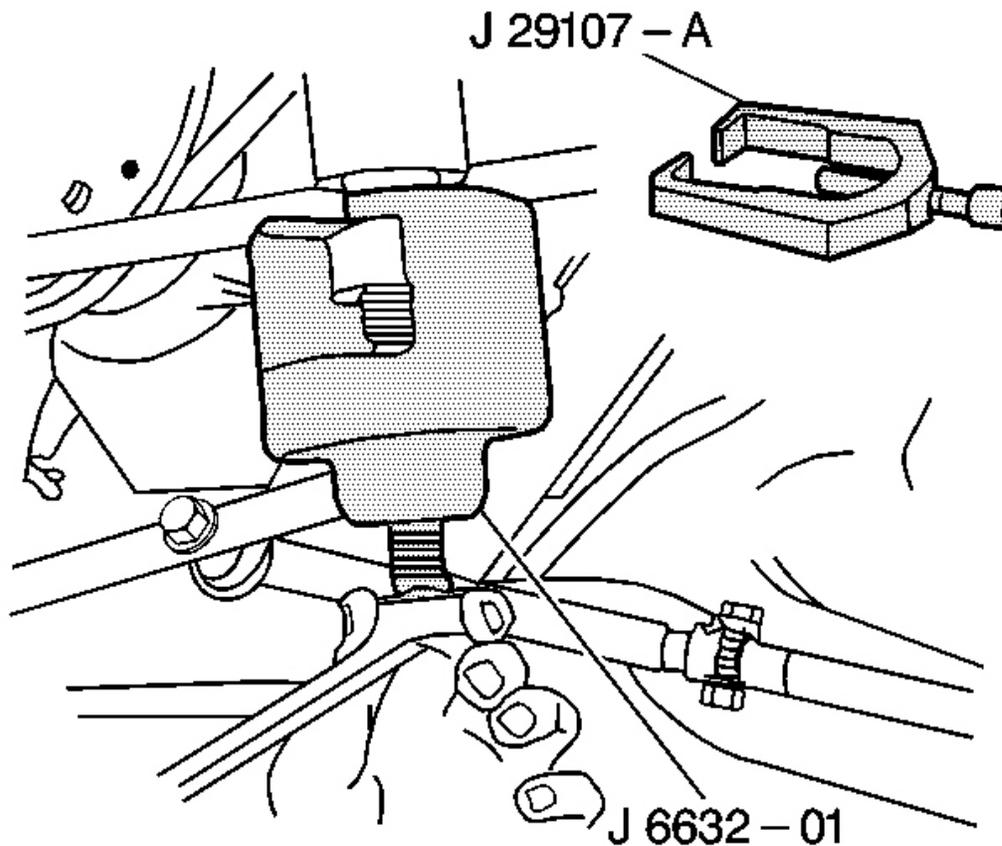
Using J 29107-A Or J 6632-01 To Remove Pitman Arm From Steering Gear Pitman Shaft
